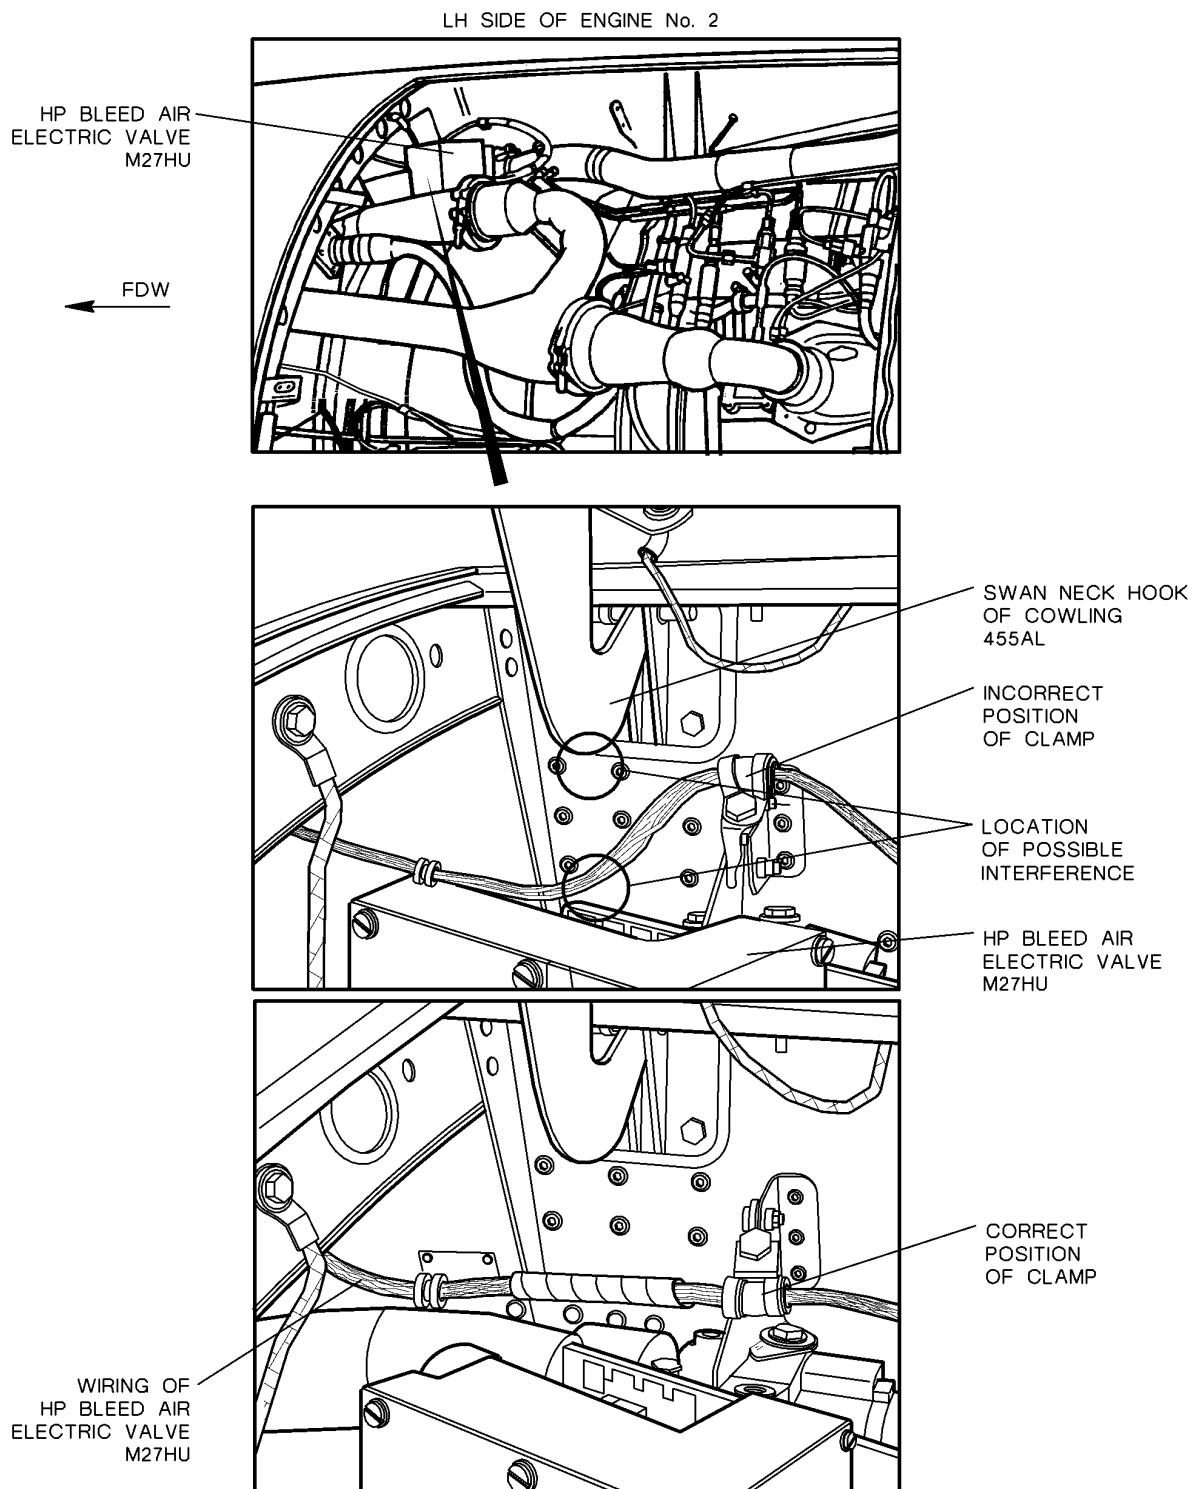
Check of HP Bleed Air Valve Wiring Routing
